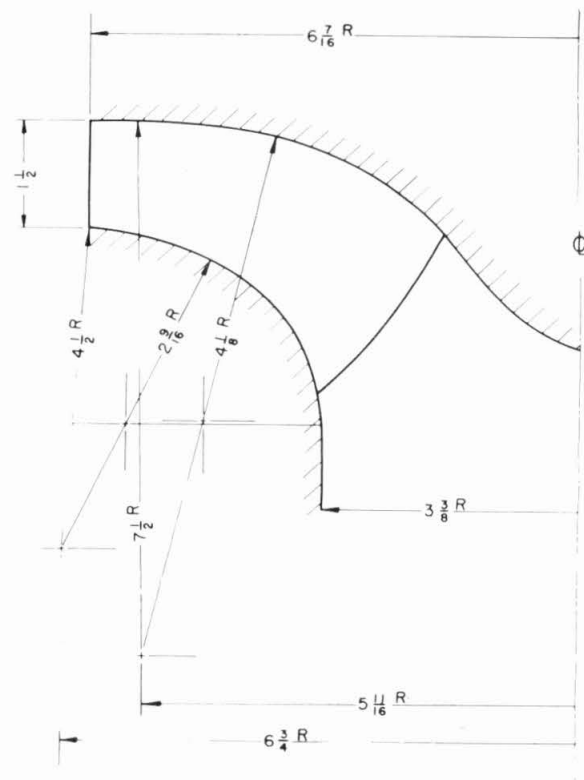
CROSS-SECTION SKETCH OF THREE-DIMENSIONAL IMPELLER
